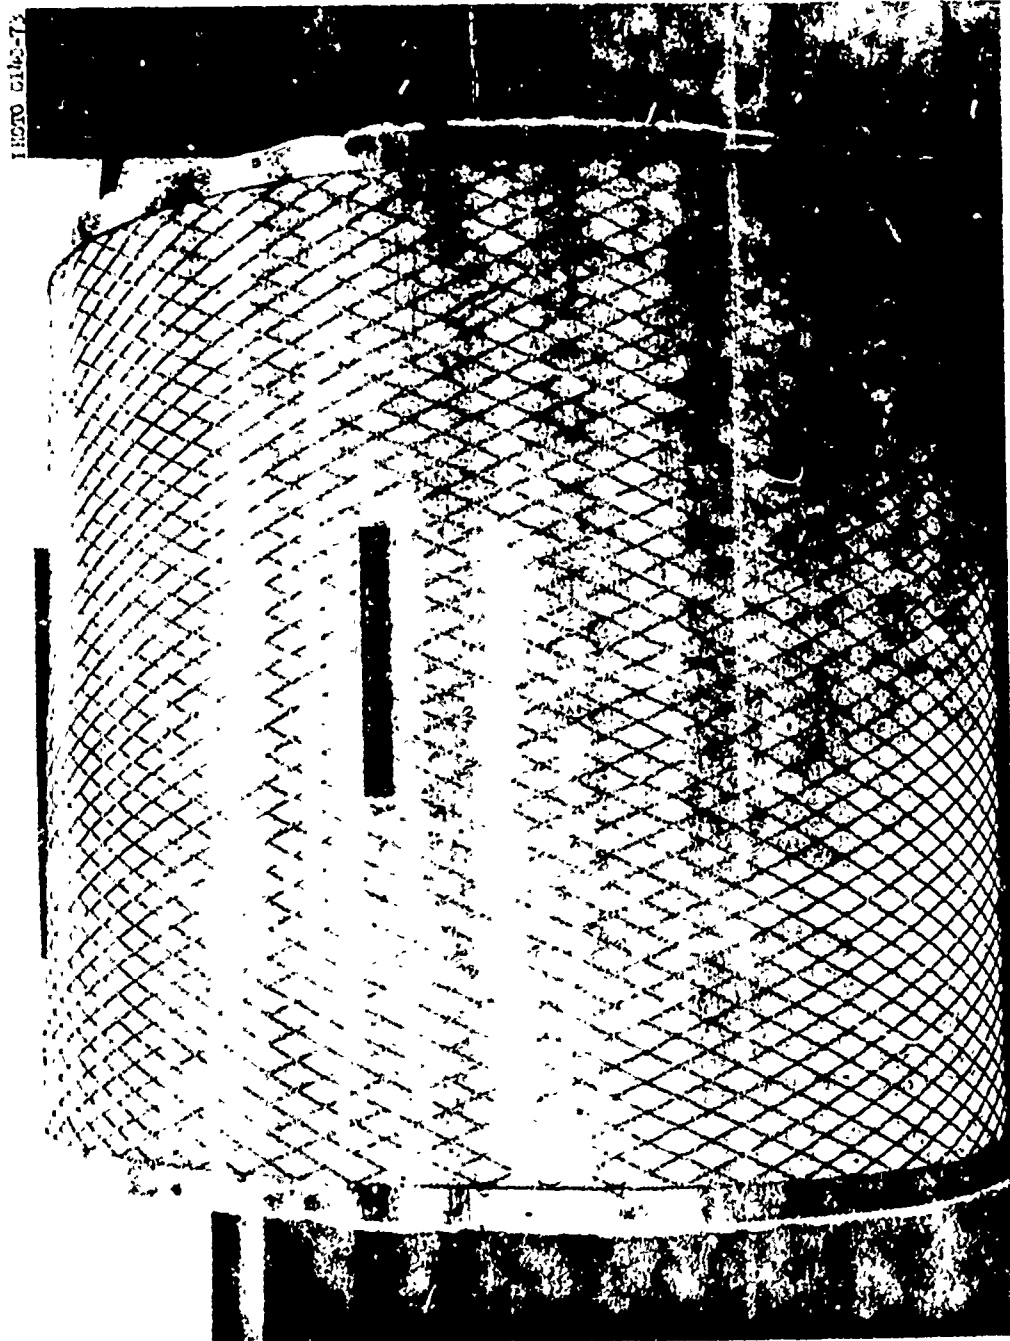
Completed fusible insulation with the outer layer of expanded metal installed.
